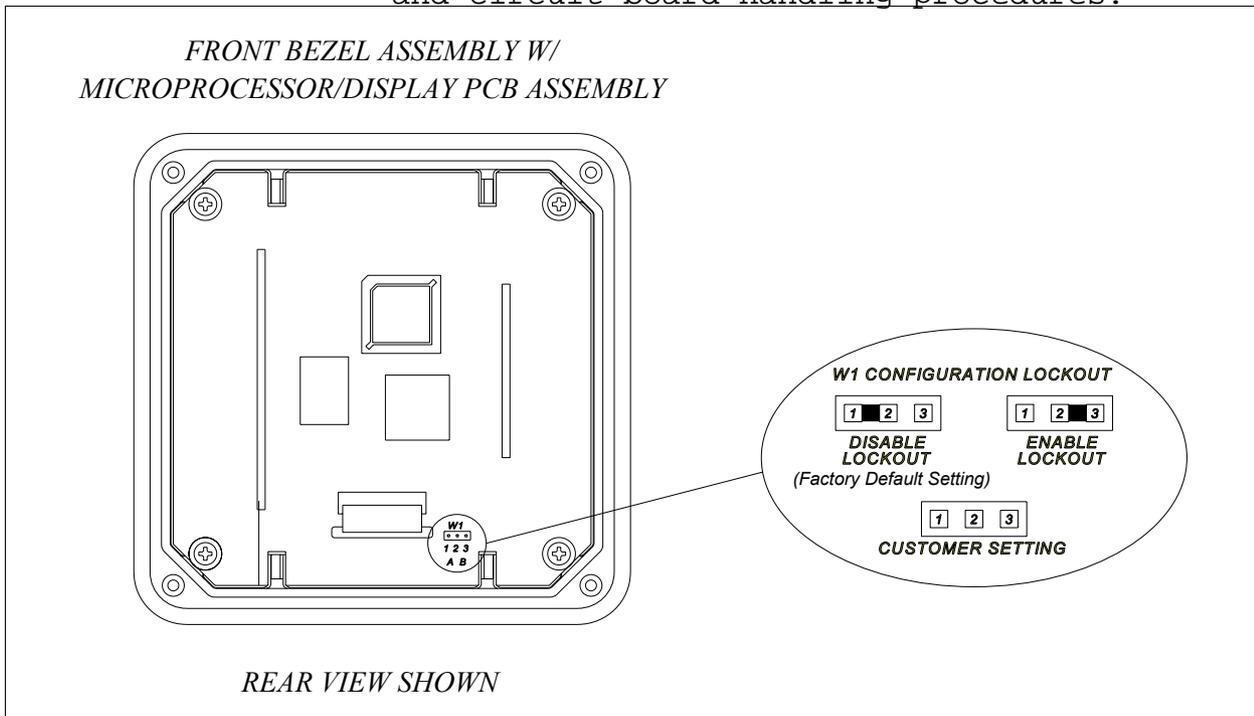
Configuration Lockout Jumper Location On Microprocessor/Display PCB Assembly.
